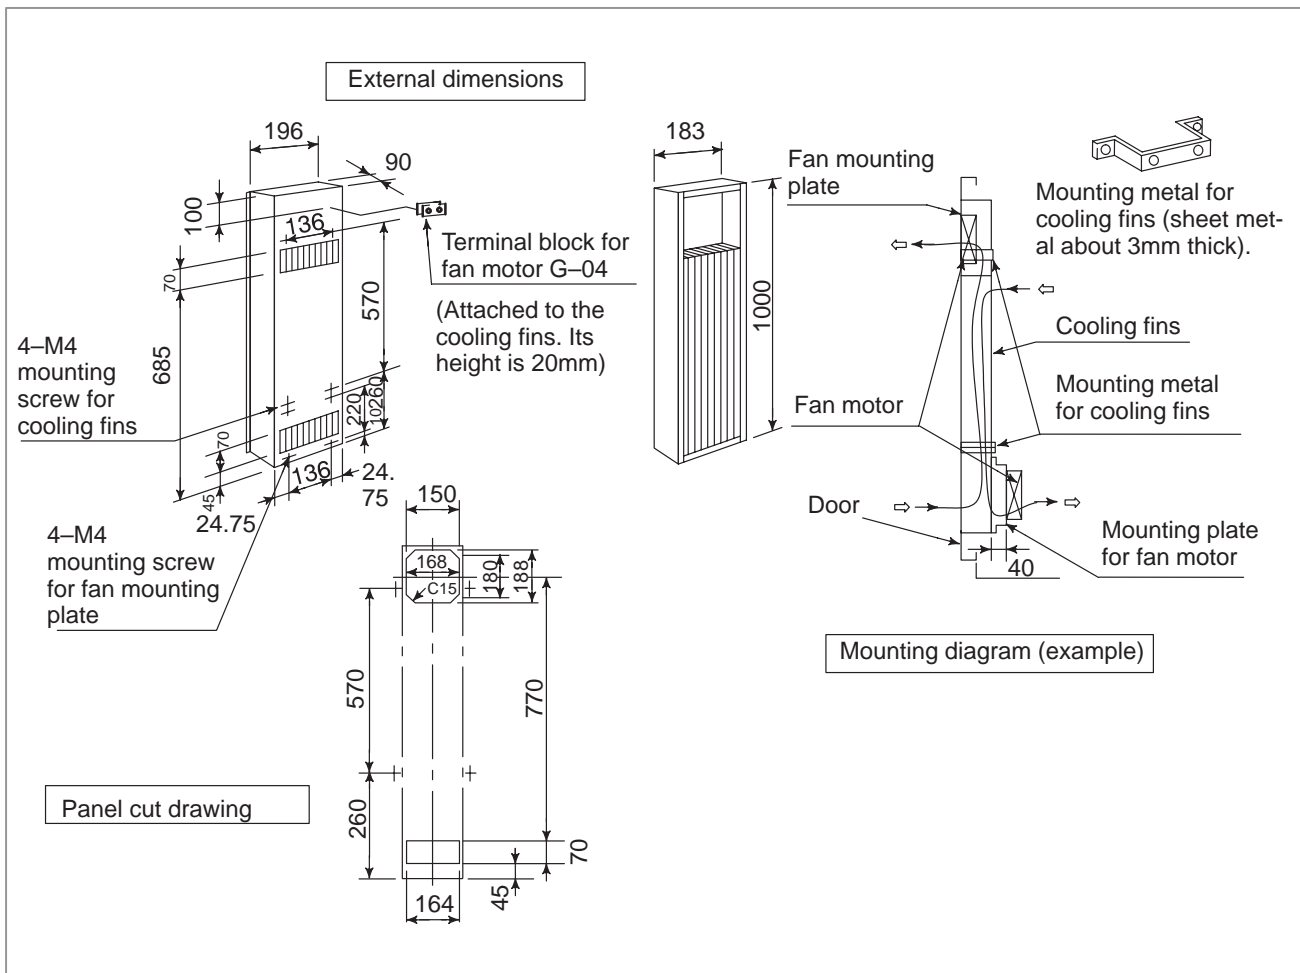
(c) External dimension and mounting method of cooling fin (A02B-0053-K303)
